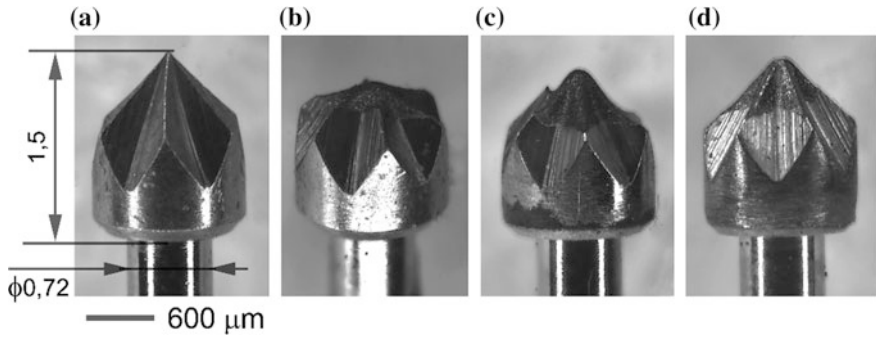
Photographs of the electrode tool after: a ECMM, b EDMM, c an improperly designed EC/EDMM machining sequence, and d a properly designed EC/EDMM machining sequence of the cavity presented in Fig. 12 [42]
